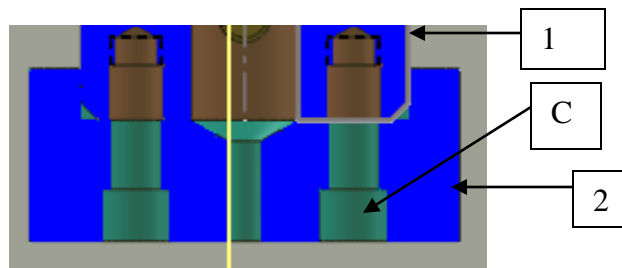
Square shoulder screws for screwing component 2 and 1 together
